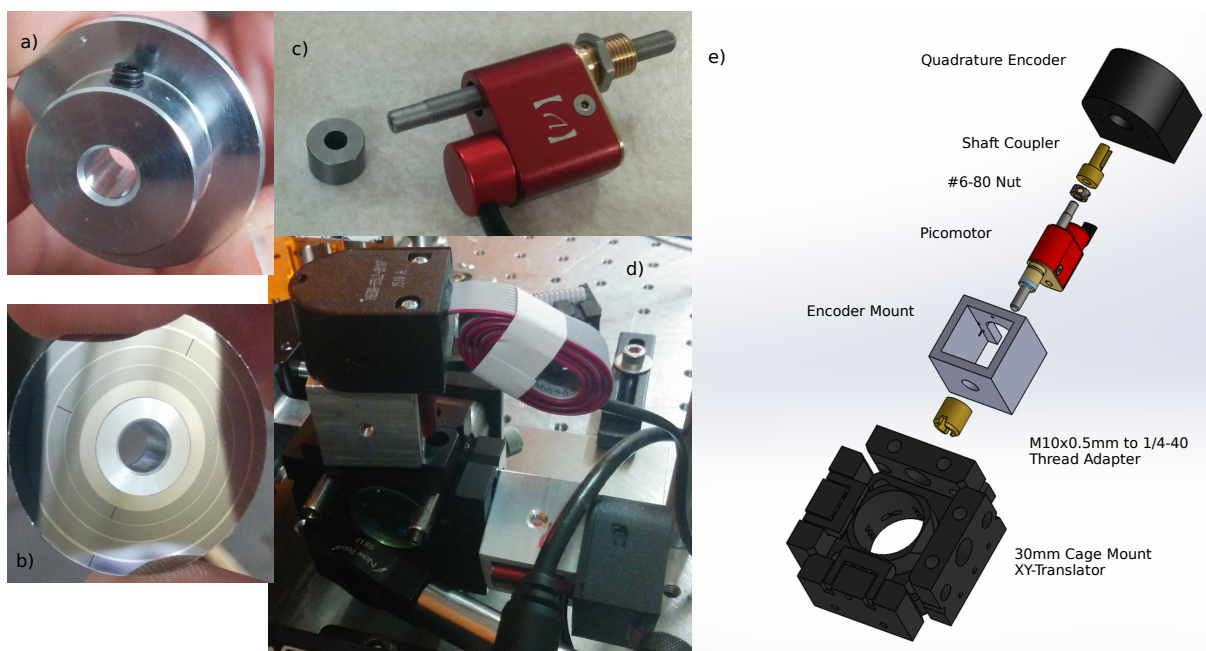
The custom closed-loop Picomotor mechanics. Do NOT disassemble the encoder other than removing the lid. The markings on the wheel are very easy to damage so leave it in the encoder housing. a) Front and b) back side of the encoder wheel. c) Newport tiny Picomotor 8354 with thumb knob removed. d) An assembled XY translation stage installed in the 780 addressing laser system. e) An exploded view of the components required. The XY translator can be replaced with any appropriate kinematic mount by replacing or removing the thread adapter.
